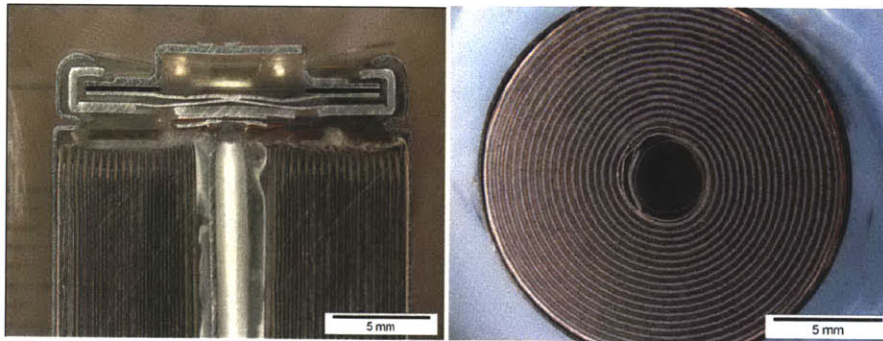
Photograph of an 18650 Lithium-ion cell cross-sectioned longitudinally showing the crimp and seal assembly.
